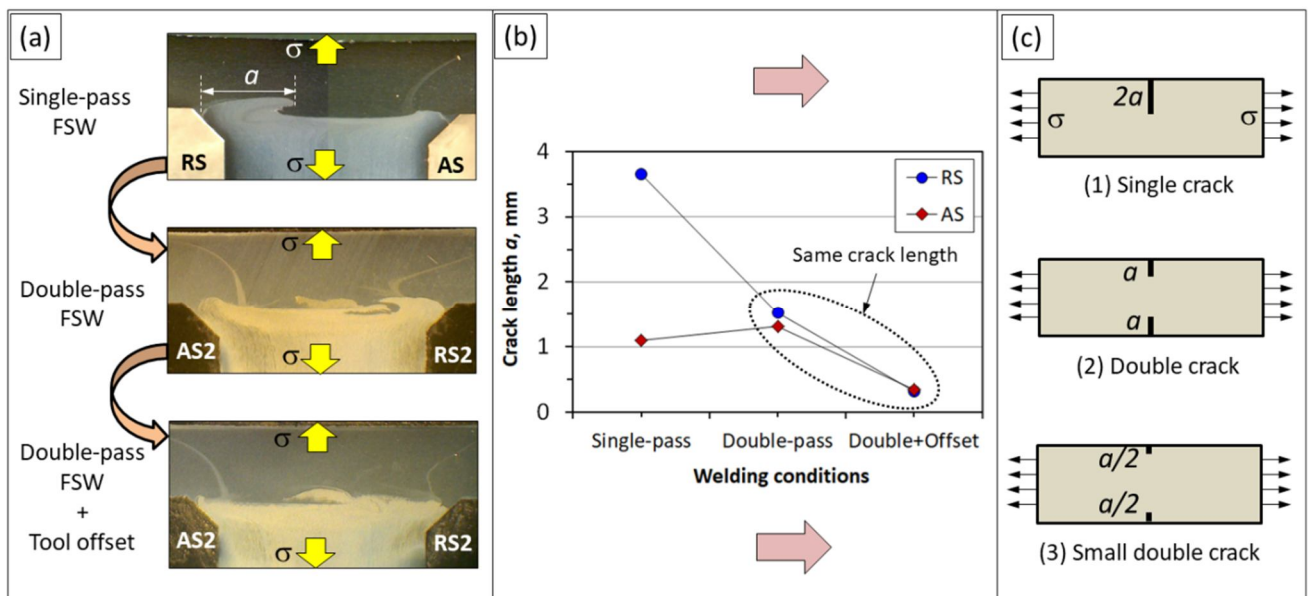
Effect of various welding conditions on (a) cross-section, (b) crack length, and (c) simple mechanical model in fracture of FSWed T-lap joints.
